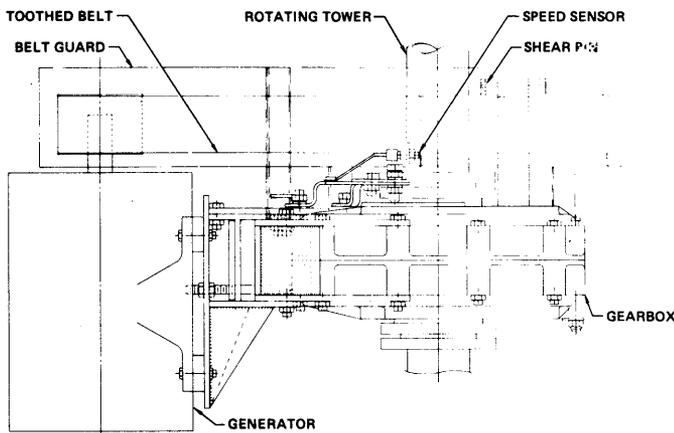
ELECTRICAL DRIVE SYSTEM ASSEMBLY Side View
